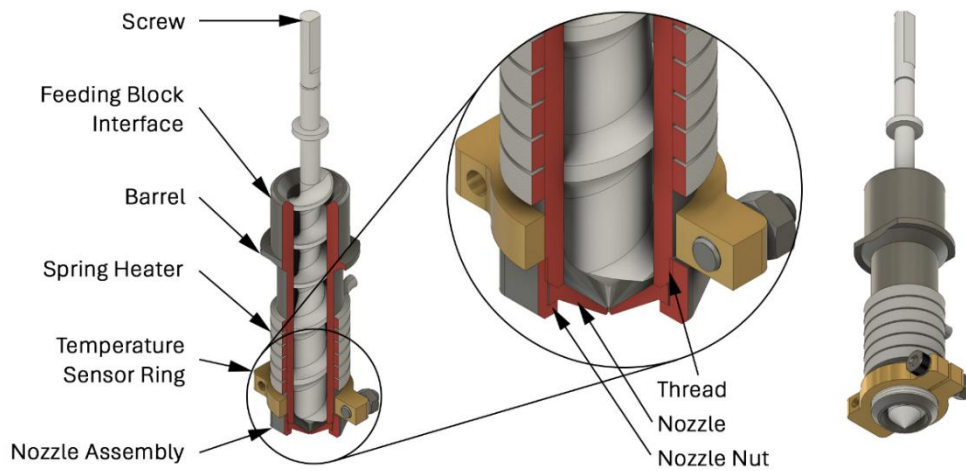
Extruder 3, 14 mm barrel with nozzle assembly, temperature sensor ring and spring heater.
